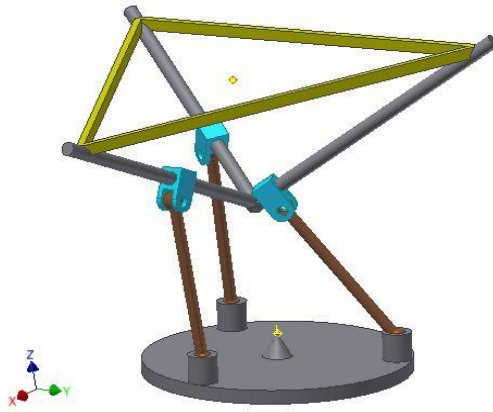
Inverse kinematic singularity of 3-PRR manipulator
